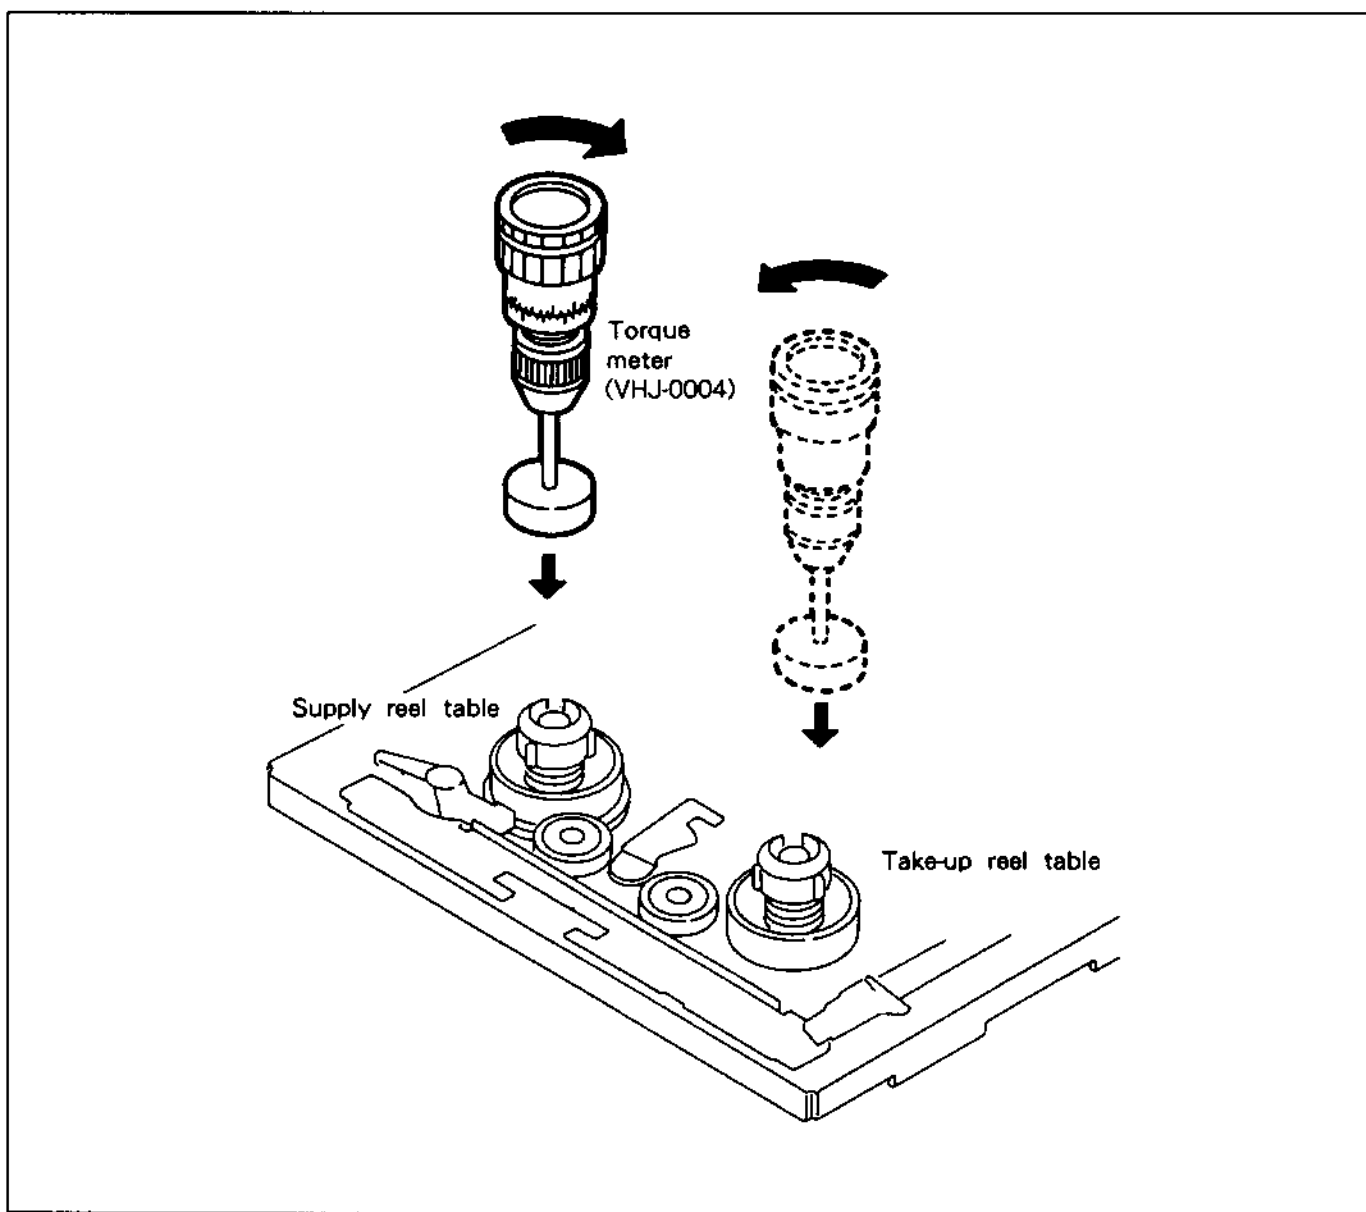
Checking REW/FF/PLAY Torque
